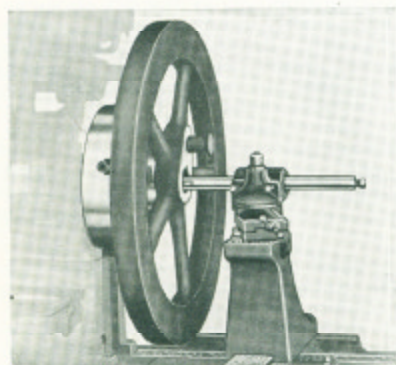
Boring and bushing a fly wheel for a large gasoline engine crankshaft.
